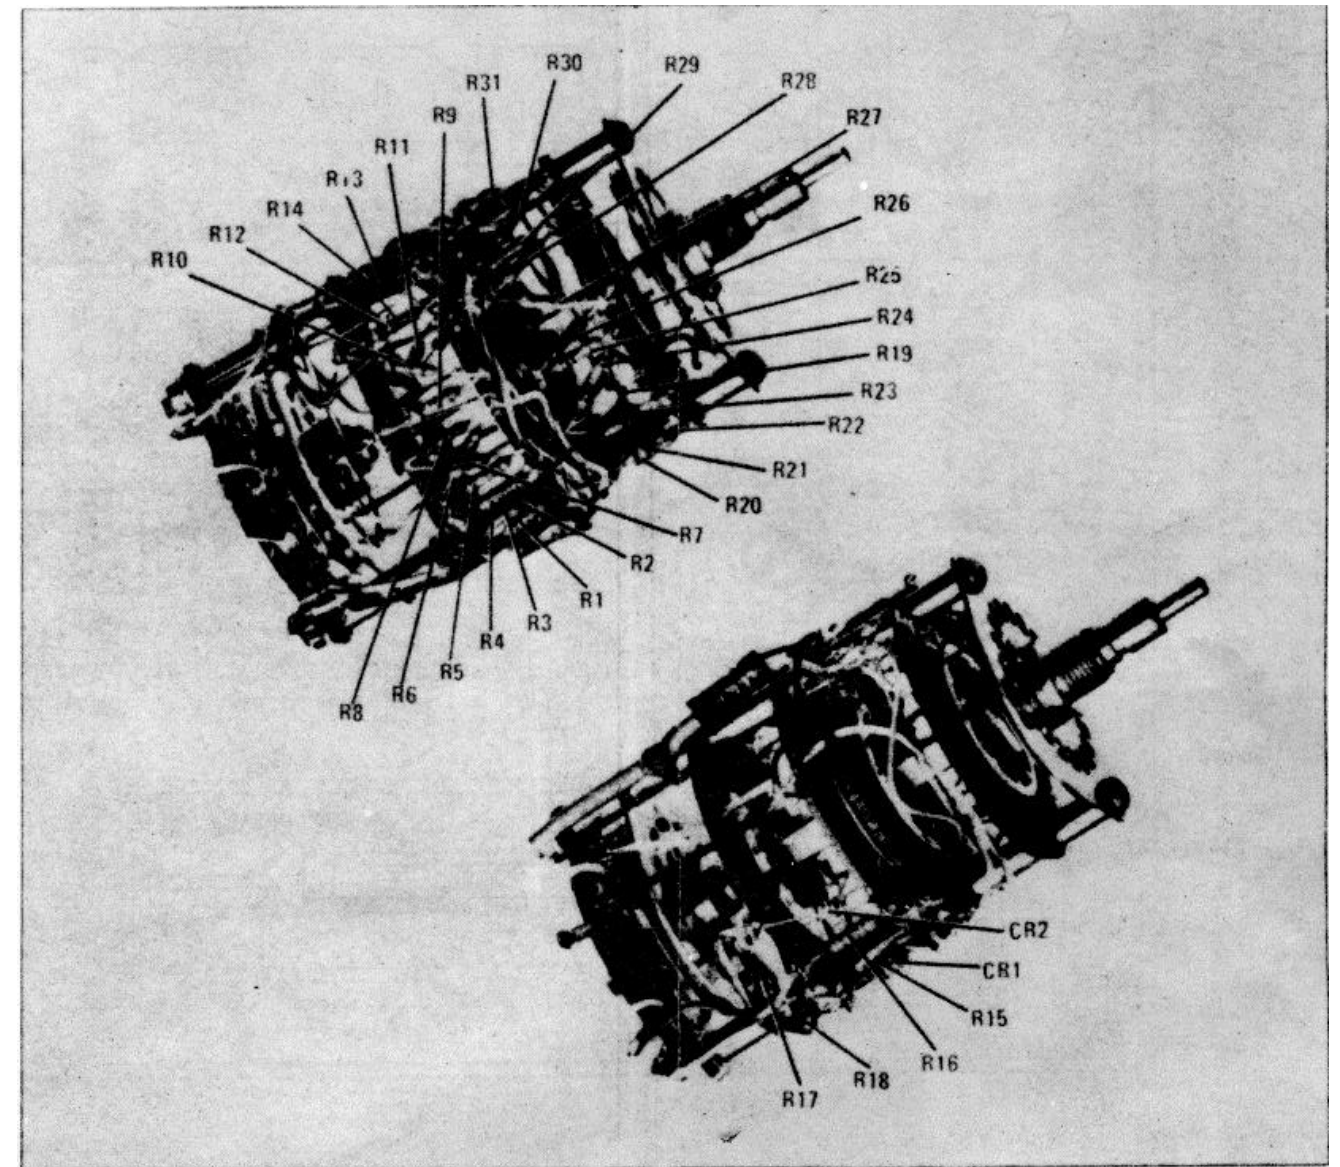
Scan Width Attenuator Assembly A2 (08553-60125)
